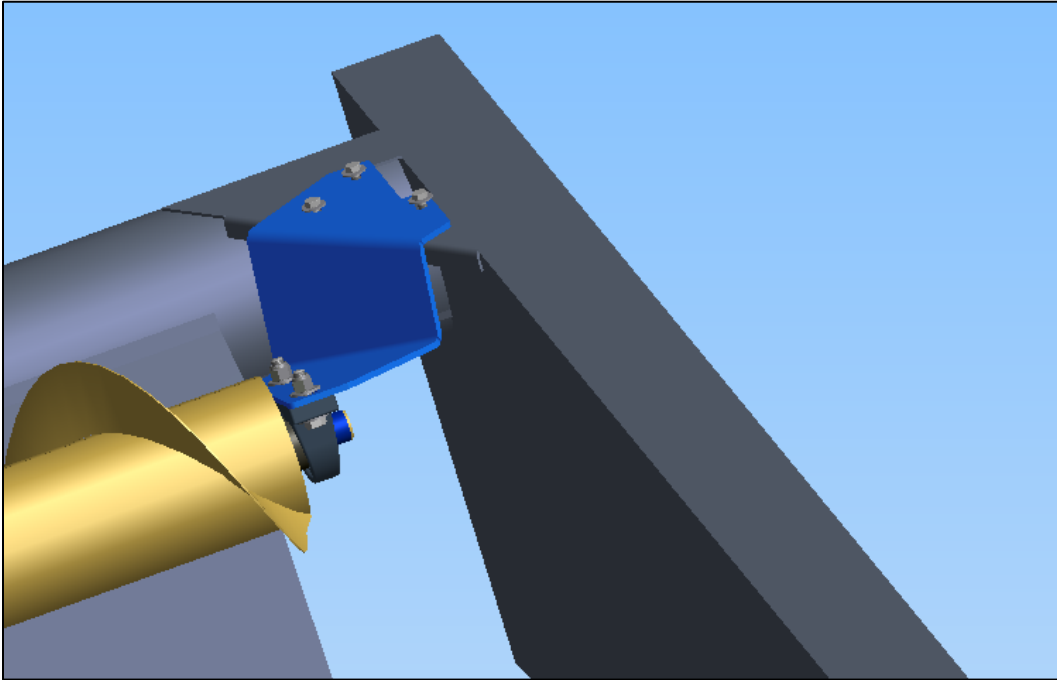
RIGHT HAND END SHOWING STOP BOLT AND INSTRUCTIONS
